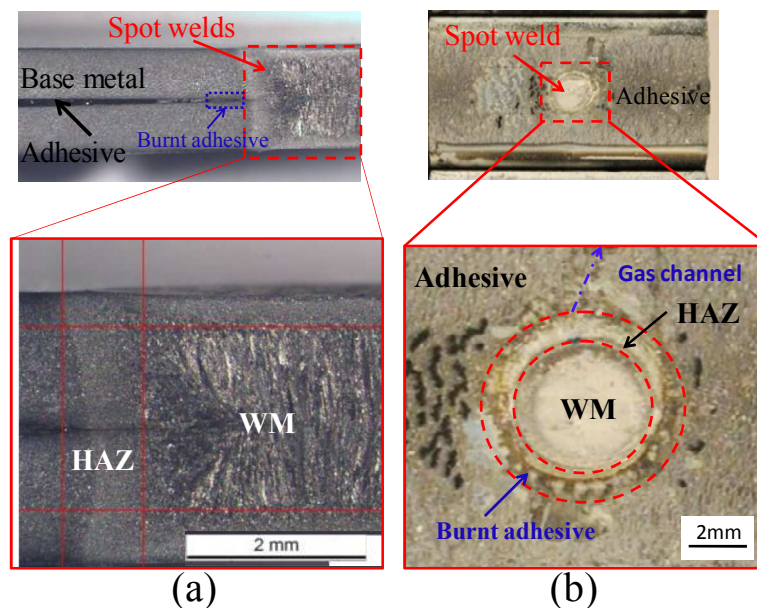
Macrostructure of weld bonded joint: (a) transverse section, (b) in-plane section
